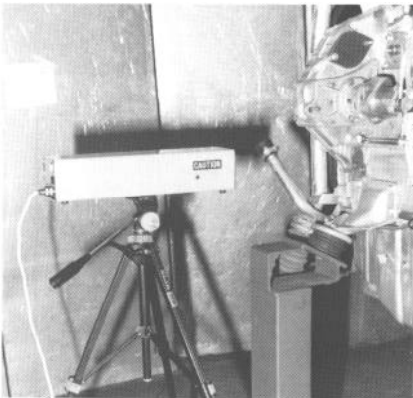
Measuring unbalance of a flywheel in a diesel engine (photograph courtesy of the Automotive Design Advisory Unit, Southampton, England)
